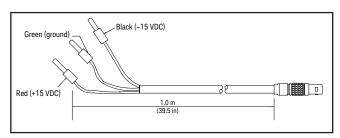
Mechanical dimension for cable option with banana plugs (87405C-101)
